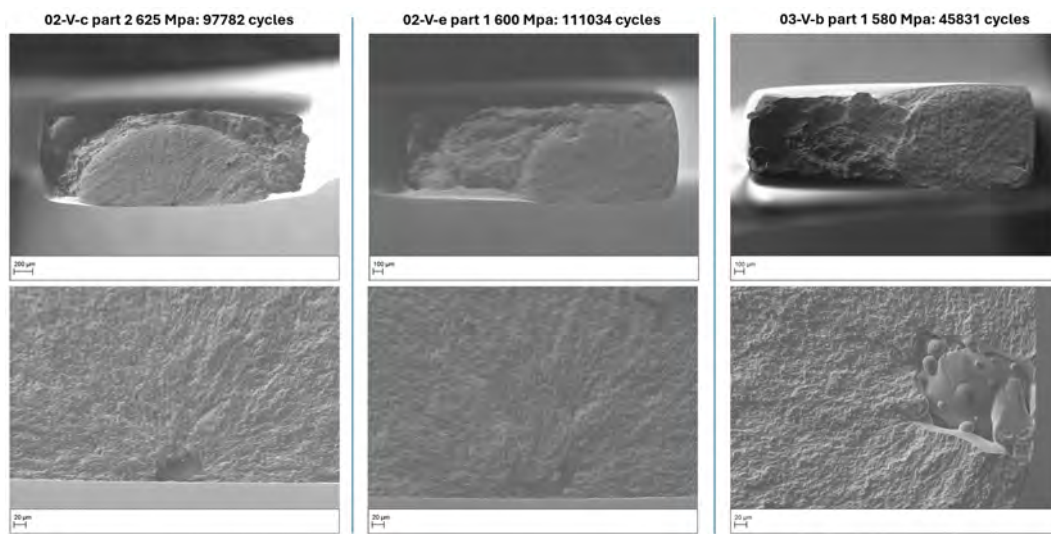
SEM fracture surfaces of vertically built LPBF UNS S32760 HCF specimens. The figure reports representative fracture surfaces of specimen 02-V-c, tested at 625 MPa and failed after 92782 cycles; specimen 02-V-e, tested at 600 MPa and failed after 111034 cycles; and specimen 03-V-b, tested at 580 MPa and failed after 45831 cycles. The fracture surfaces reveal the presence of defect-related fracture regions, including lack-of-fusion features and partially unmelted powder particles, which may have promoted premature fatigue failure.
